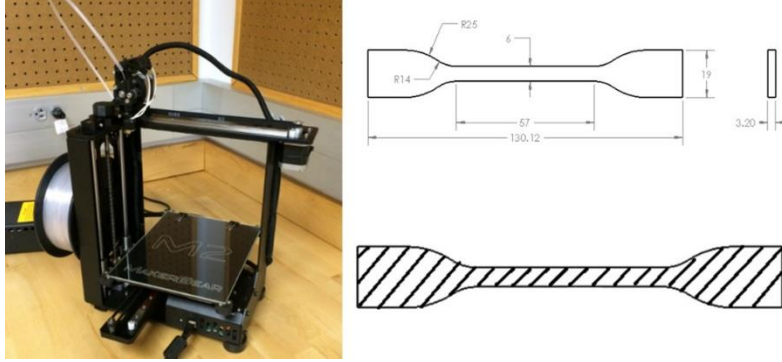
3D printer (left), dimensions (top right), and pattern example (bottom right).
